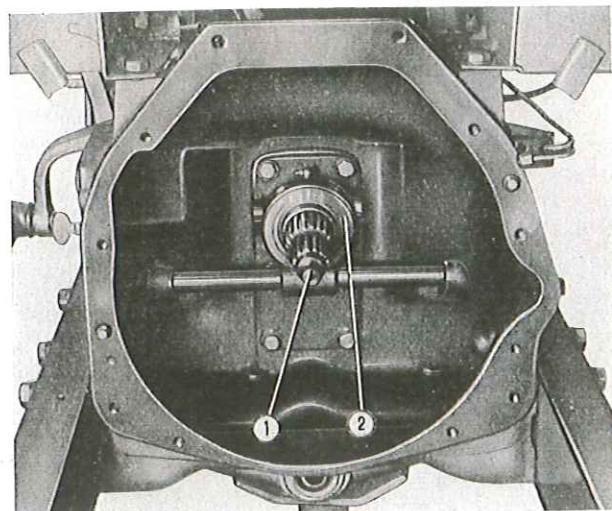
View of clutch assembly housing compartment after engine removal.
